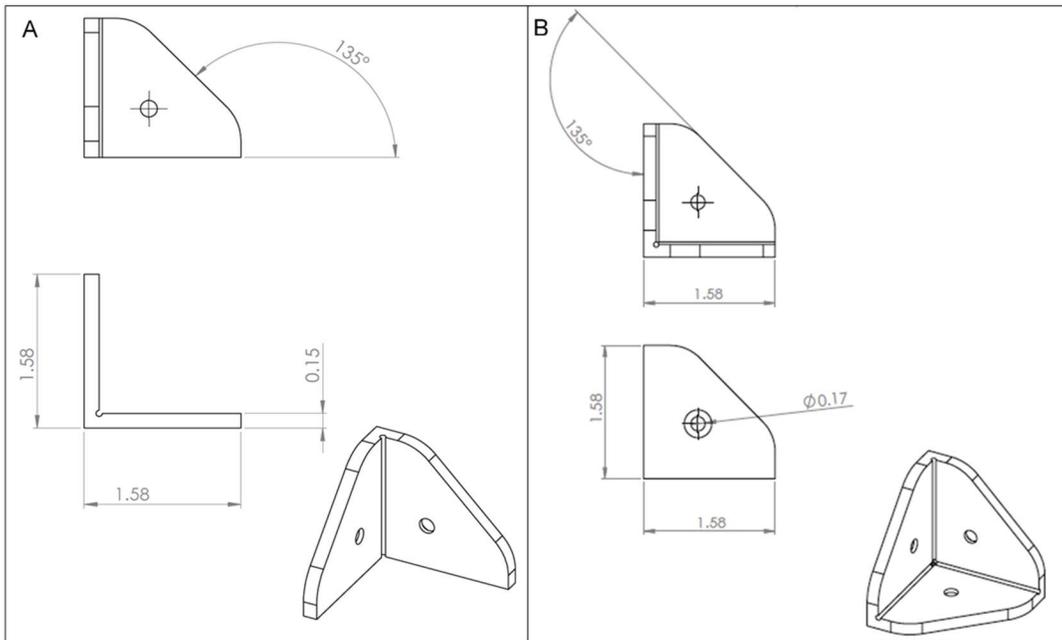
Dimensions (in millimeters) of 3D printed corner options: (A) double corner to affix panels adjoining the door and (B) multi corner used to secure three panels throughout the remainder of the collection unit.
